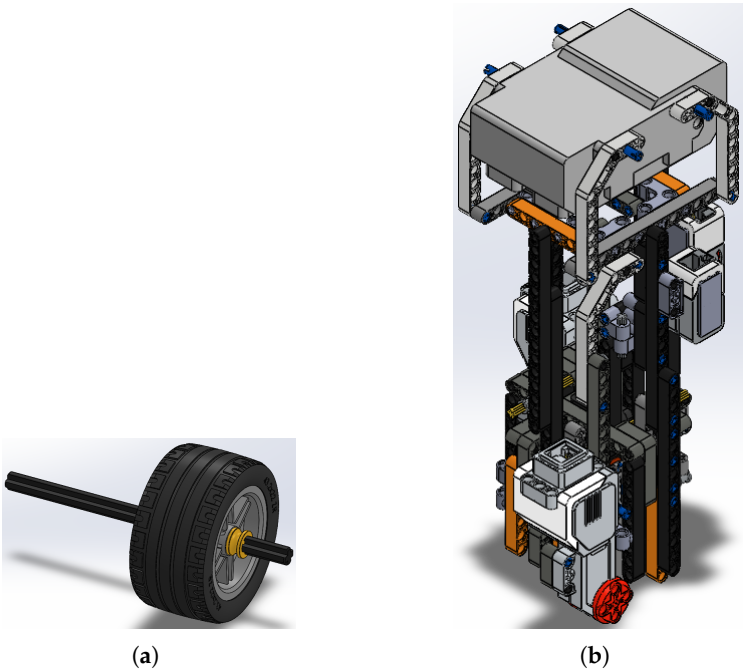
Subassemblies used for the overall assembly of the EV3BRS: (a) subassembly of the EV3BRS’s wheels, (b) subassembly of the EV3BRS’s body.
